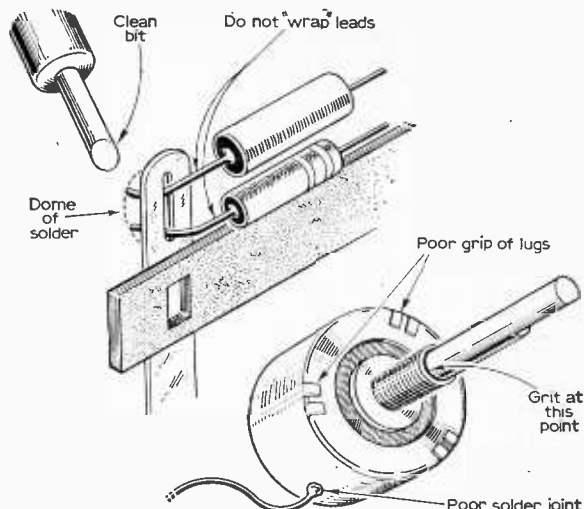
Make straight joint through lug and allow solder to run on cleanly from a well-shaped iron bit.
